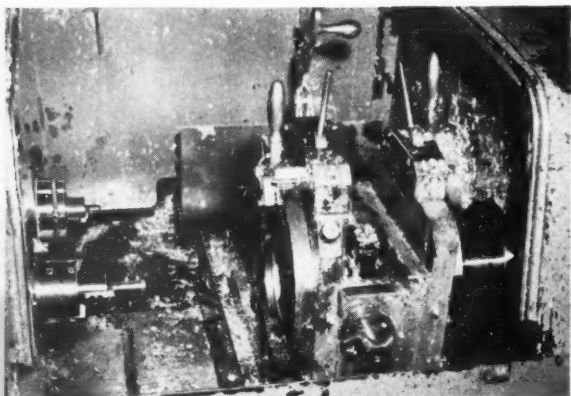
View from front of Heald Double End Bore-Matic showing tooling at left.
